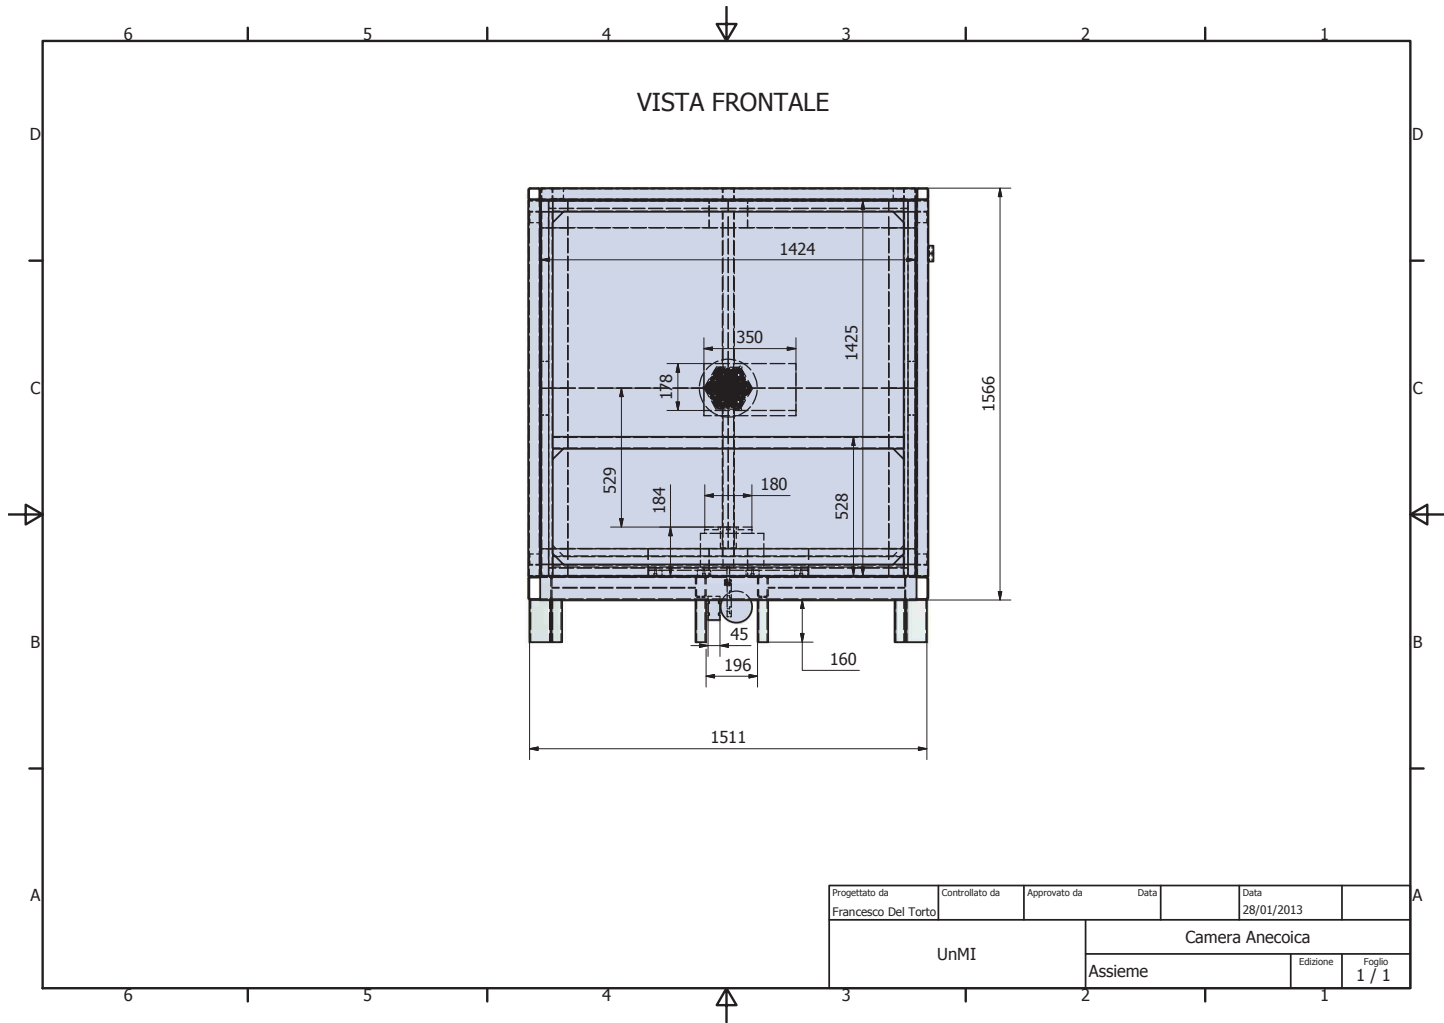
CAD drawing of the front view of the anechoic chamber.
